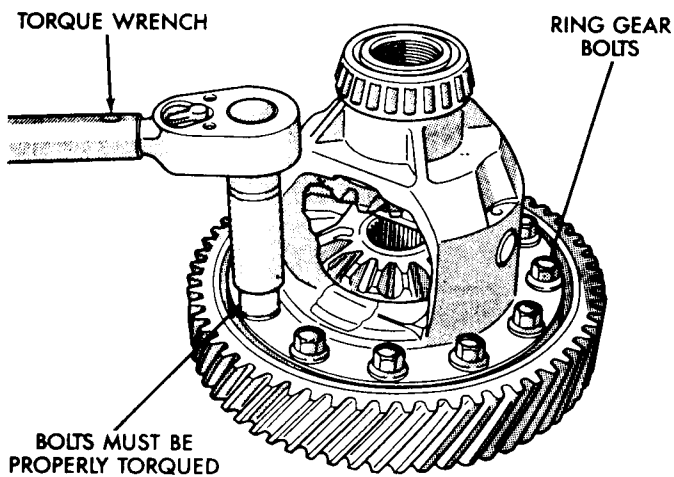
Torque New Ring Gear Bolts to 95 N·m (70 Ft. Lbs.)
